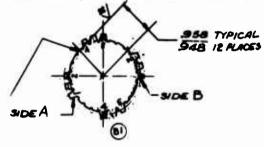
Fatigue Test Gear Configuration 14--EX-78785.
